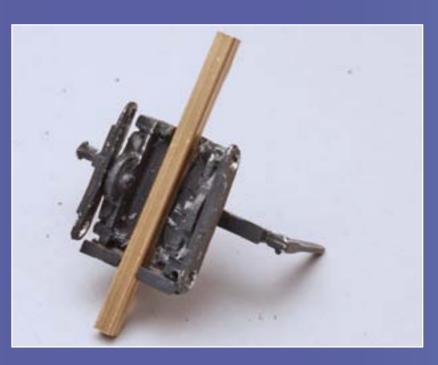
I cut a piece of 5/32" square brass tubing to 10' scale feet which would be used on the bogey. I then affixed the larger diameter piece to the underside of the bogey using CA.
